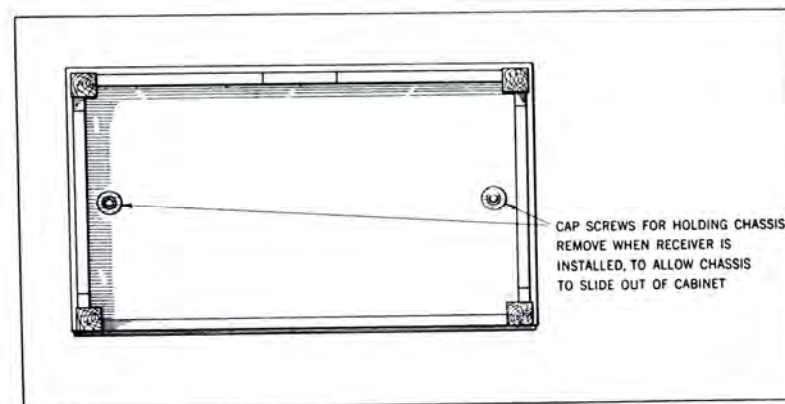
Bottom View of Cabinet of No. 734 Receiver, showing Cap Screws to Anchor Chassis in place
